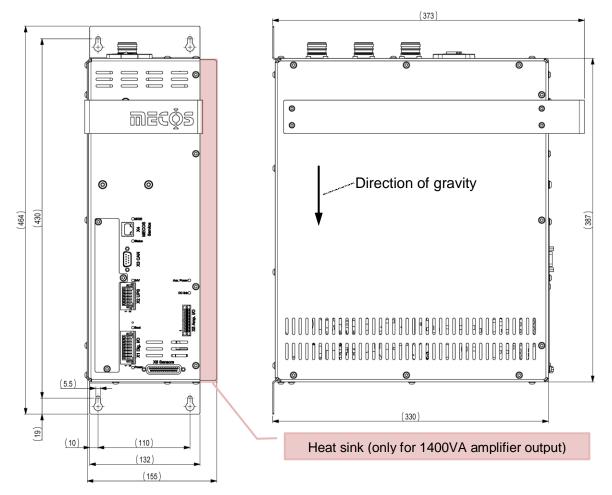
Assembly view - variant with heat sink, Hummel M23 bearing connector, and D-Sub sensor connector
